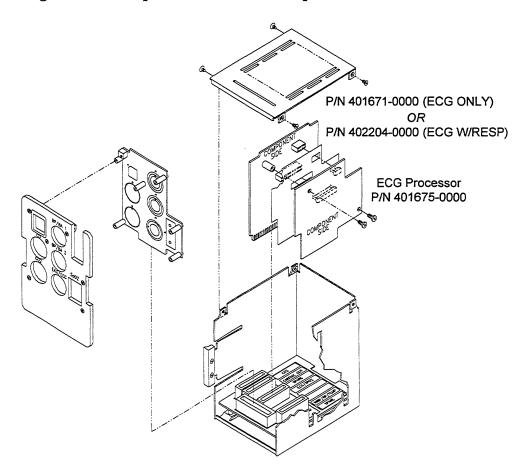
ECG Only & ECG/Respiration Options - Exploded View
